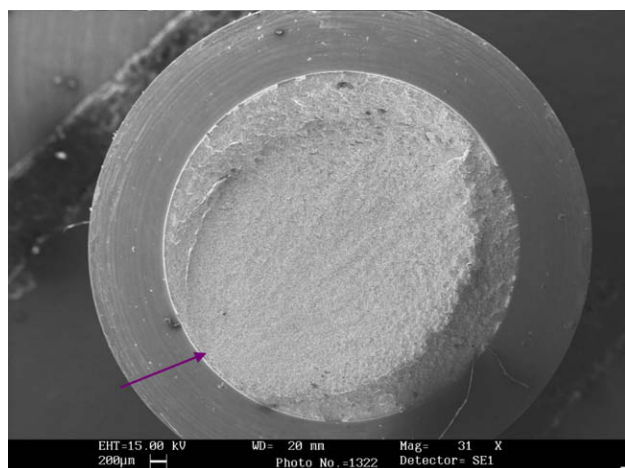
Low magnification view of the fracture surface of the specimen No. 9 tested in 30% RH air.
